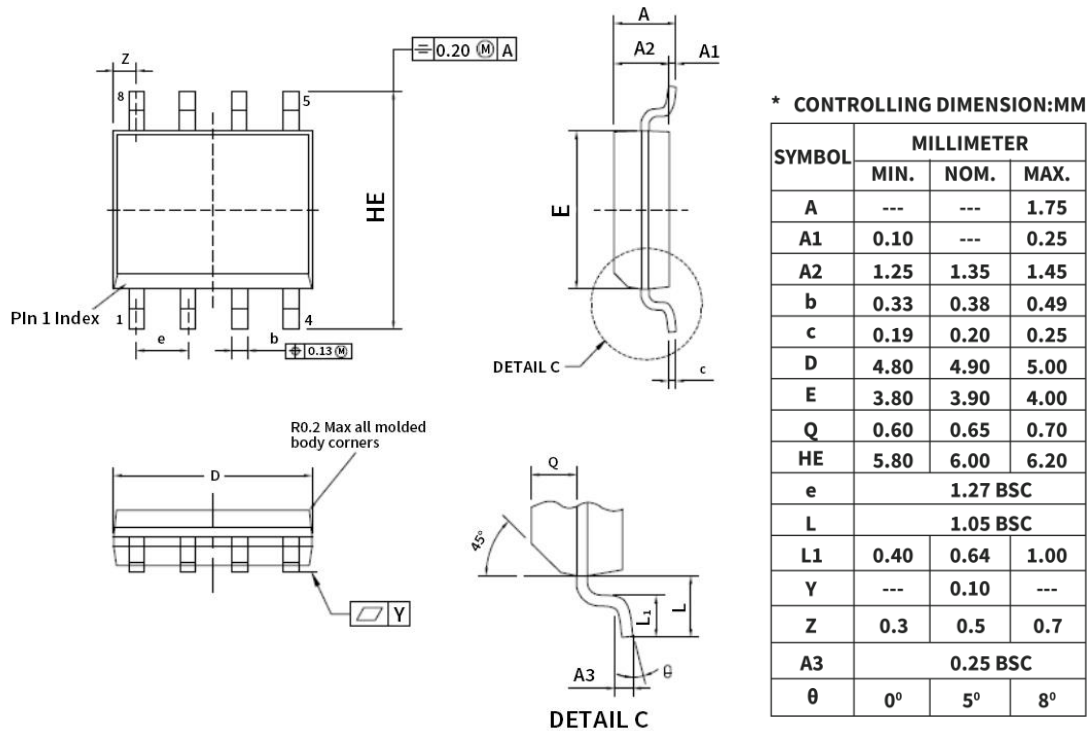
SOP8 Package Shape and Dimension in millimeters
